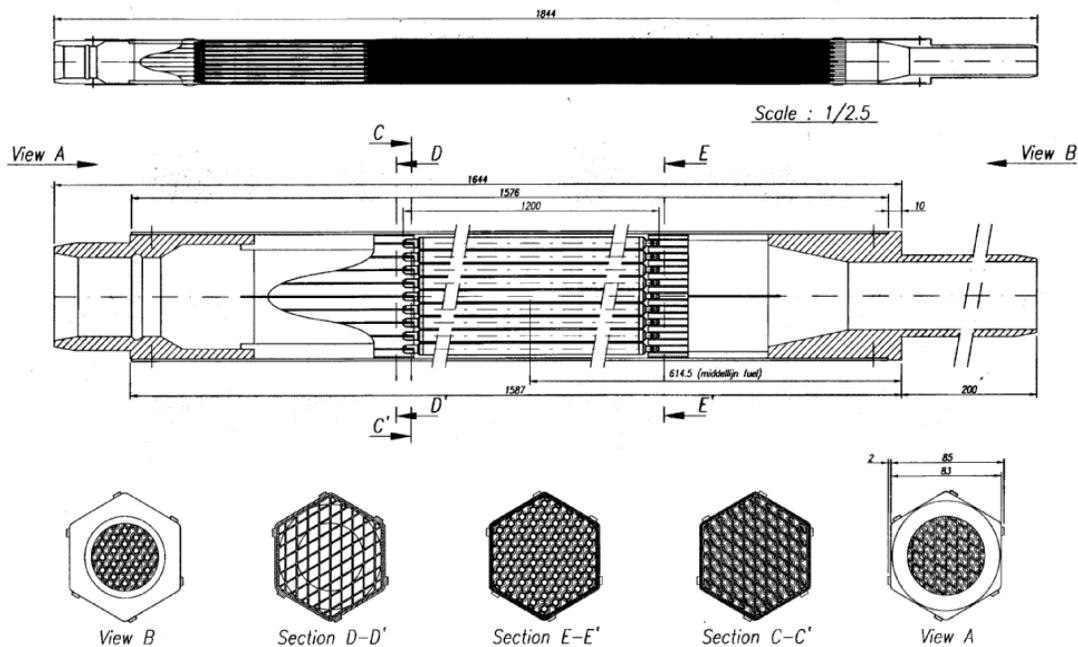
Preliminary design of the MYRRHA fuel assembly [8].
